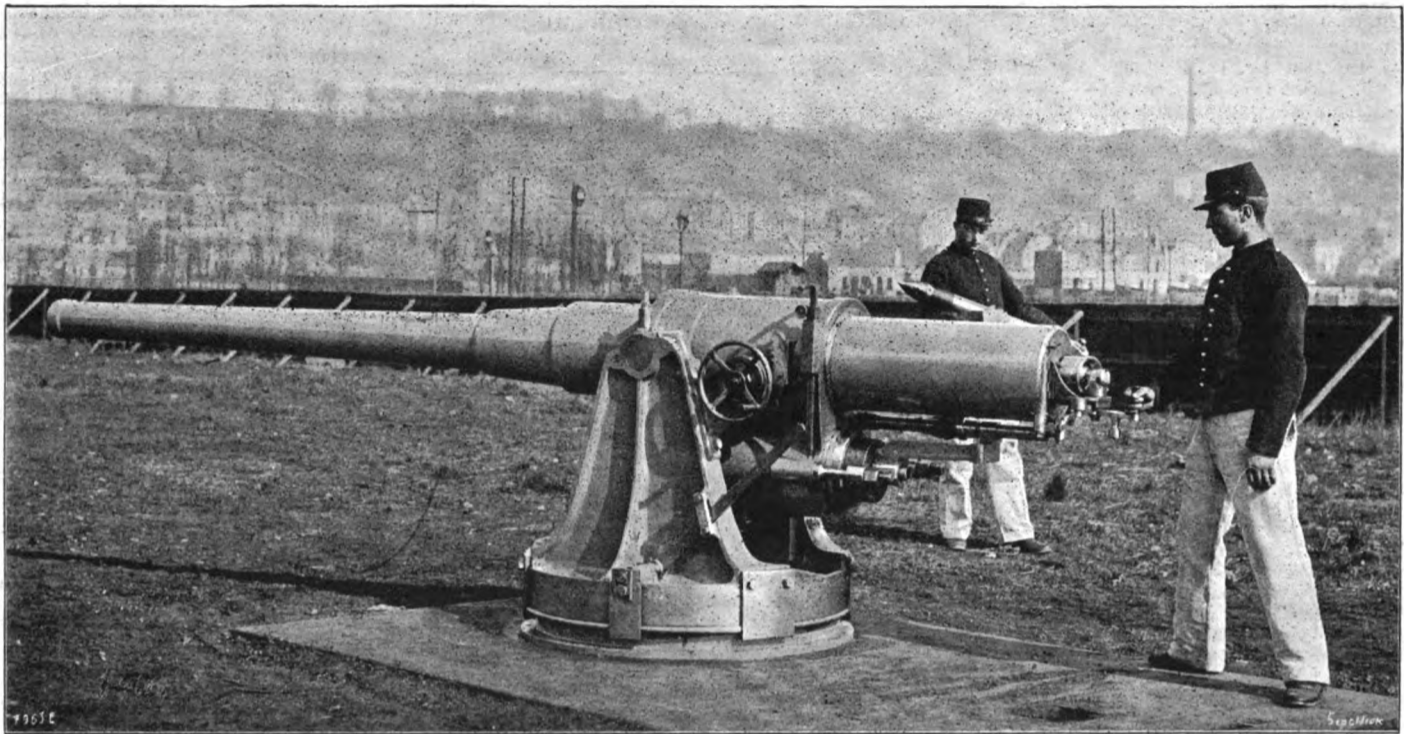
MOUNTING FOR 10-CENTIMETRE GUN, WITH HOUSING USED AS BRAKE CYLINDER.
